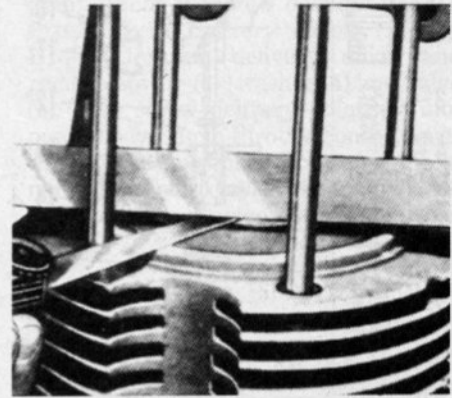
Measure piston height in cylinder and refer to text for cylinder head gasket thickness.
